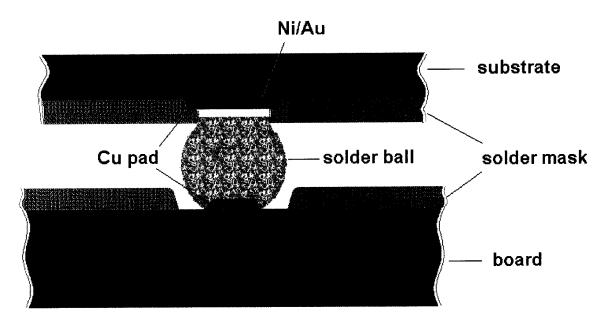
Solder ball cross-section after board assembly, shown for Ni/Au finished pad.
